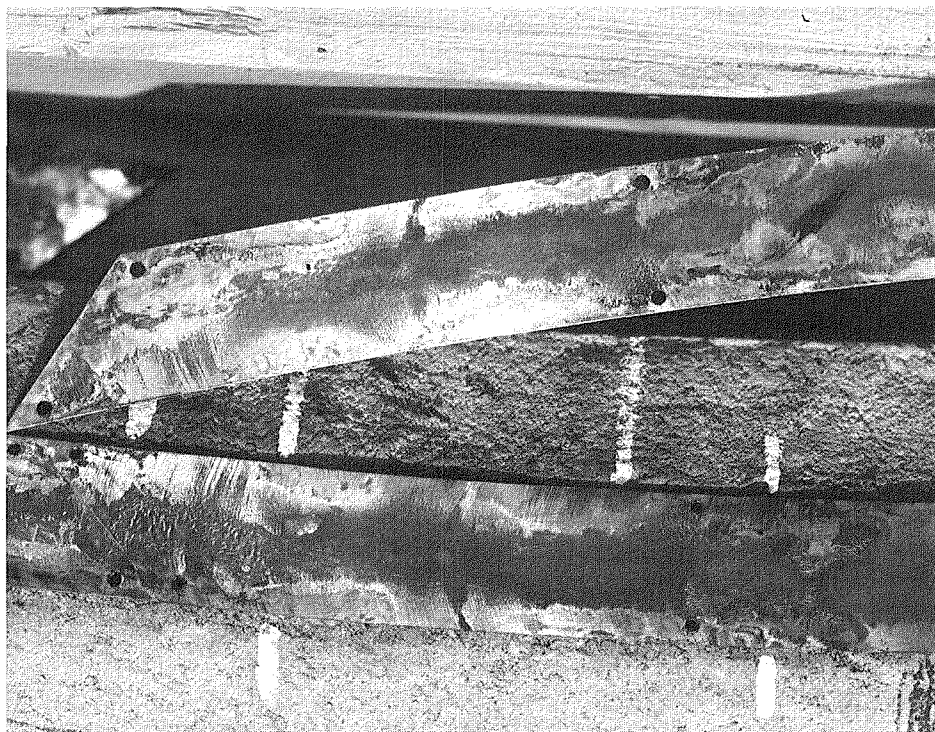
(a). Removed wear strip beside its support ring, showing fretting corrosion after 40.6 hours of running
